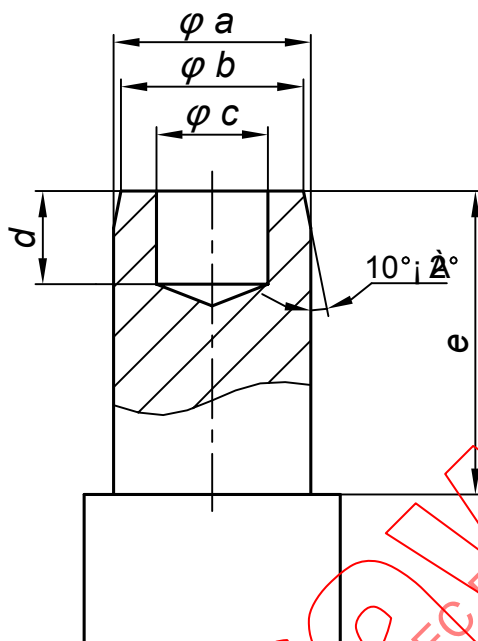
Gauge for outer contact of connector with pin-centre contact
